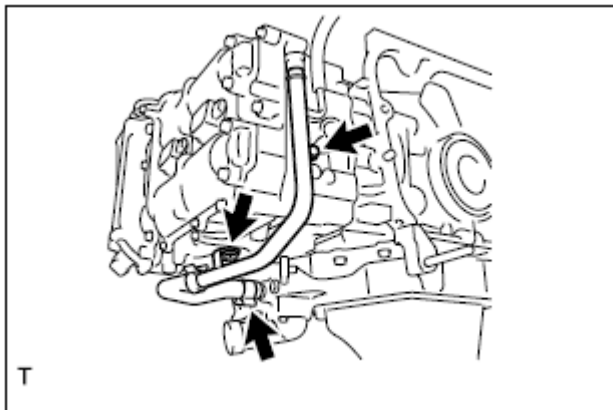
Identifying Water By-Pass Hose No. 4 Hose Clamps And Bolts
